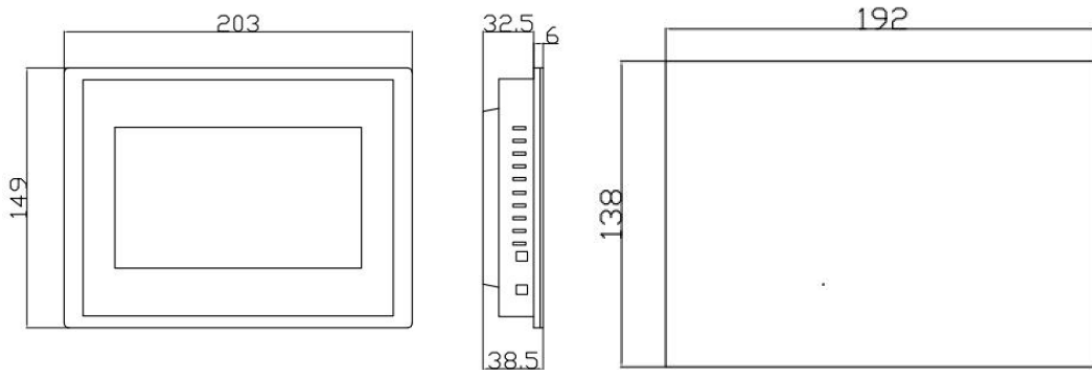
HMI dimensions on the left and panel cutout on the right
